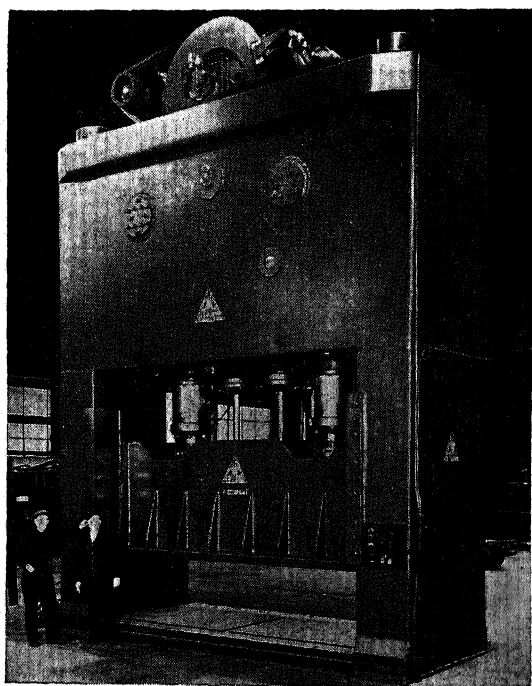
Completely fabricated, all welded steel press. Capacity 2200 tons. Distance between housing 164". Typical application: forming steel ends for box cars.
